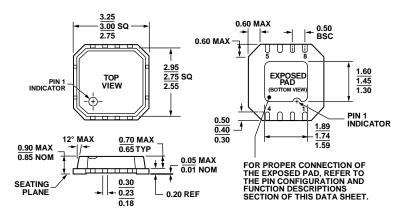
8-Lead Lead Frame Chip Scale Package [LFCSP_VD] 3 mm × 3 mm Body, Very Thin, Dual Lead (CP-8-2) Dimensions shown in millimeters
